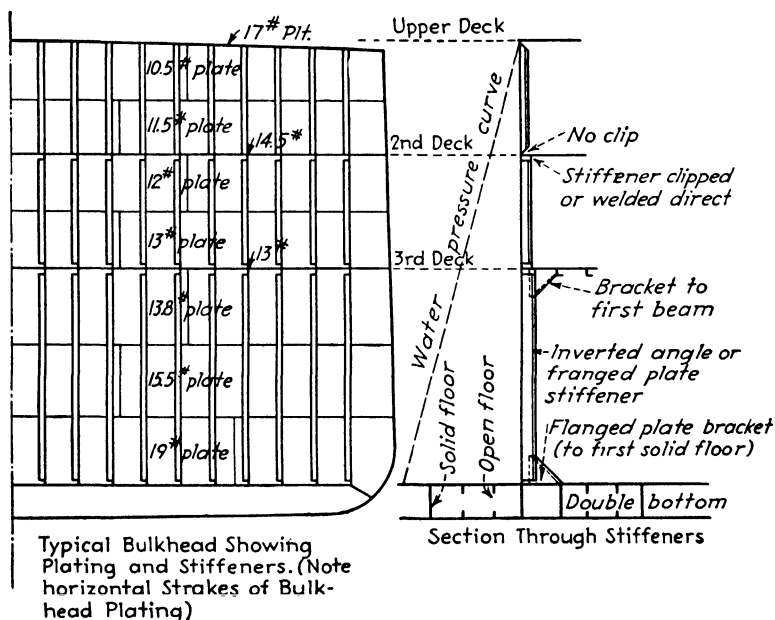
Typical merchant-ship watertight-bulkhead construction.
